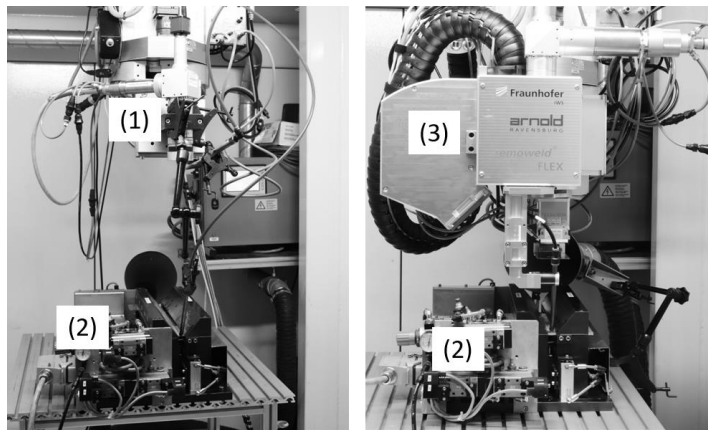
left: welding set-up static LBW; right: LBW –HF; (1) welding optics, (2) clamping device, (3) remoweld[®]FLEX optics
